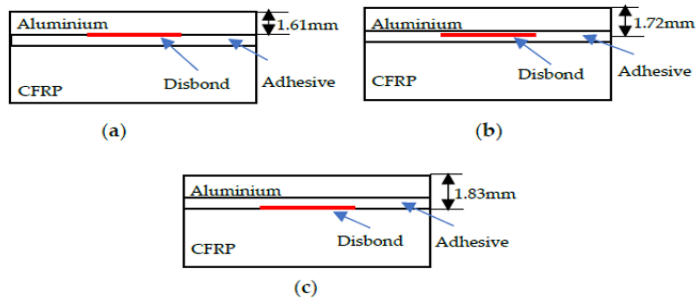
Disbond location in the adhesive layer of aluminium-CFRP joint: (a) top interface (between aluminium and adhesive), (b) middle interface (in the middle of the adhesive layer), (c) bottom interface (between adhesive and CFRP)
